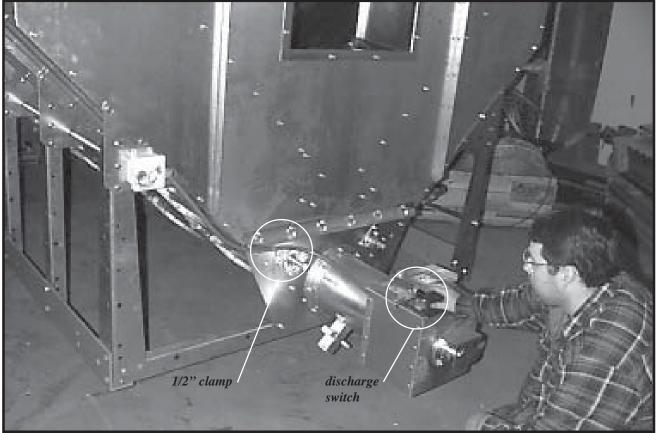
Meter roll wiring and discharge switch installed to Series 2000 dryer.
